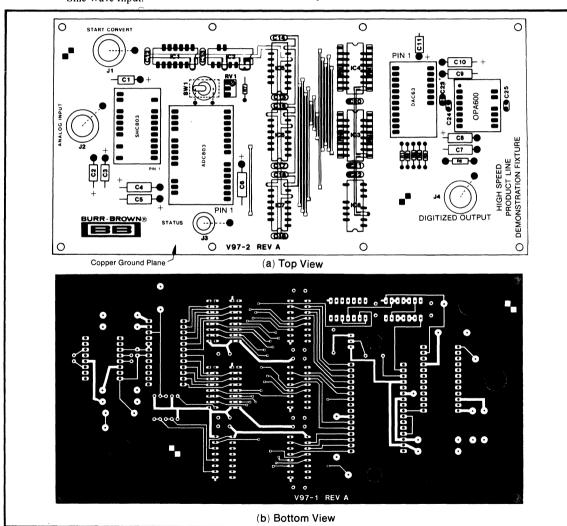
PC Board Layout for Beat Frequency Test Fixture.
